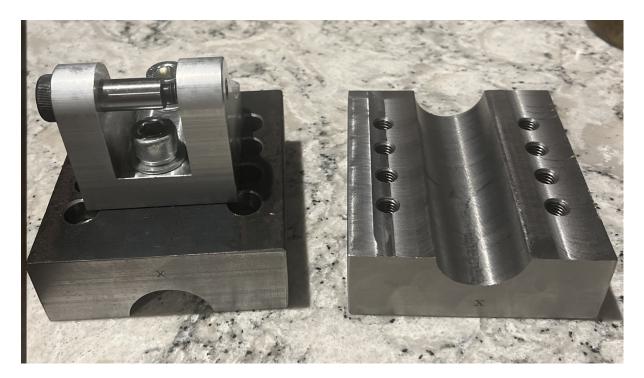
SWITCH ROD COUPLER WITH BRK-17 ATTACHED.
